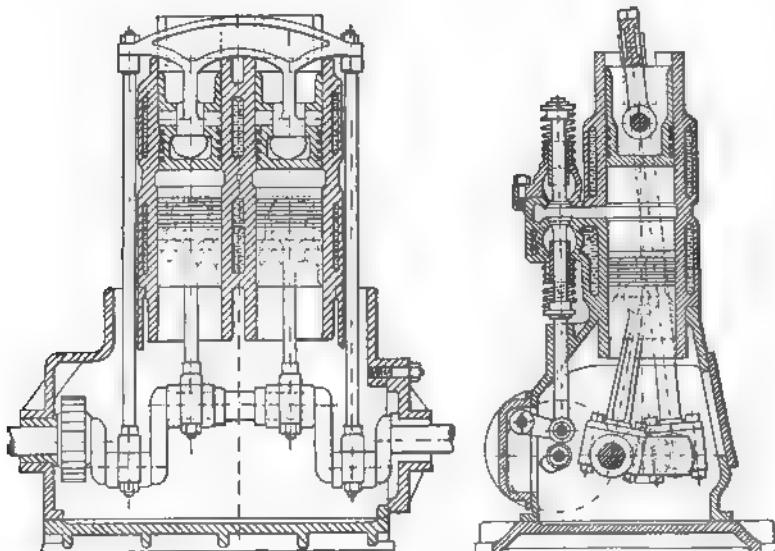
The Gobron-Brillie Two-Cylinder, Four-piston Balanced Engine.
